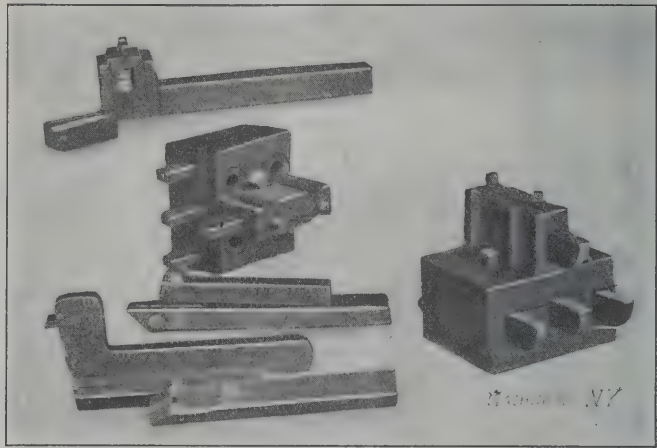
Miscellaneous Inserted Cutter, Planer Tools
